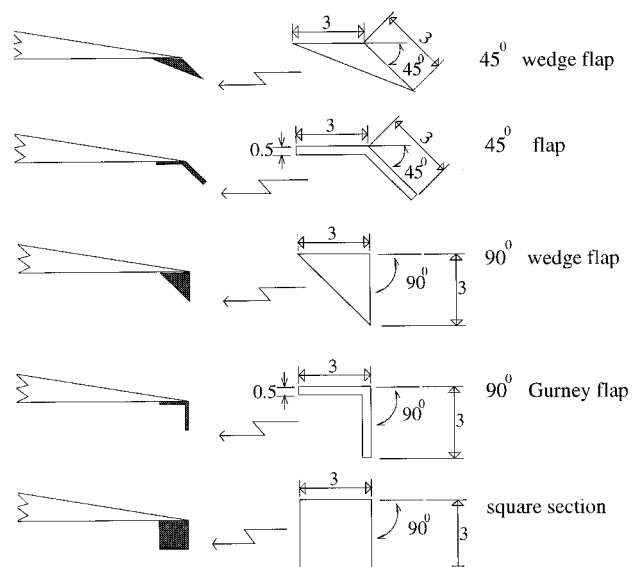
Dimensions of trailing-edge flaps (all dimensions in millimeters).
